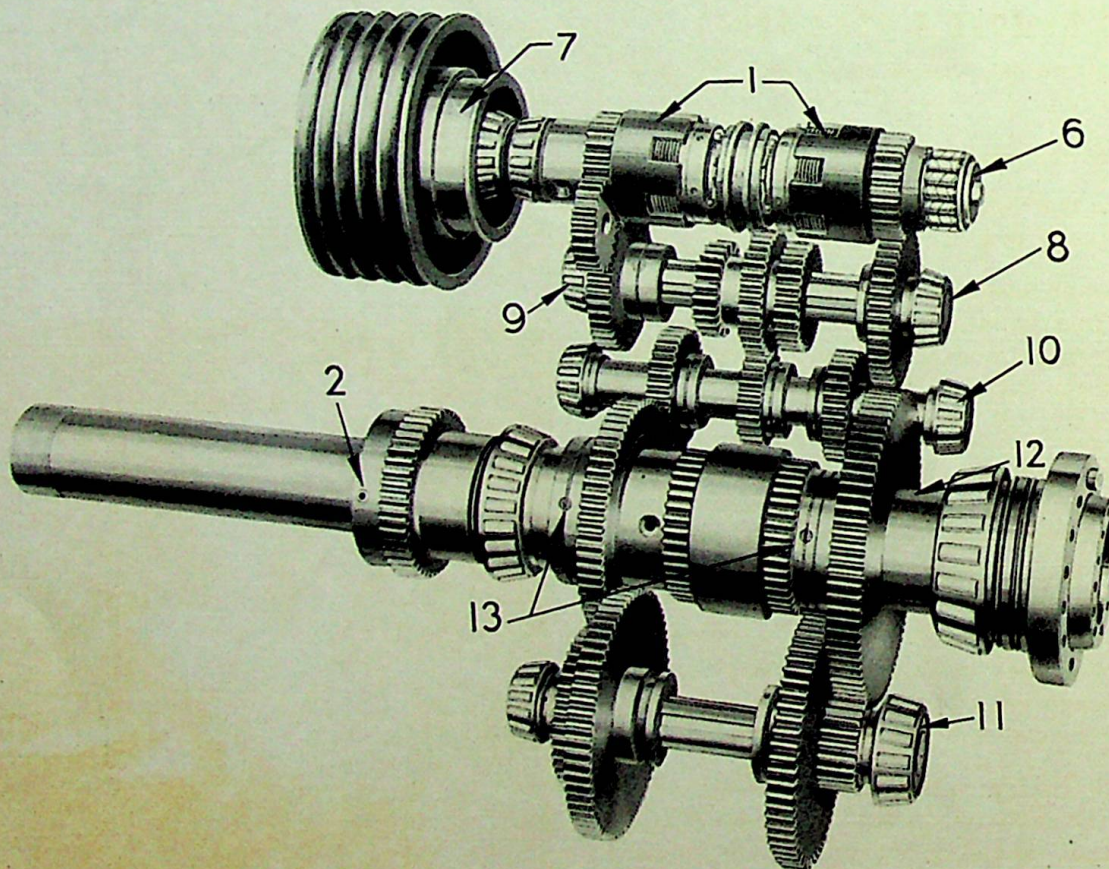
Twelve Speed Head for No. 4 and No. 5 Turret Lathes
